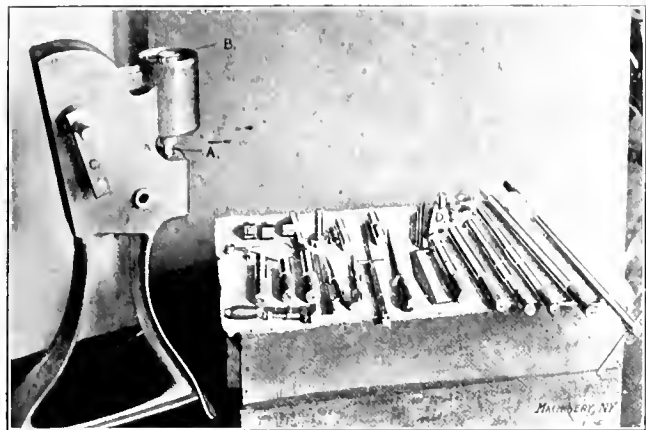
Tools used by the Inspector in testing the Work done on the Frames
